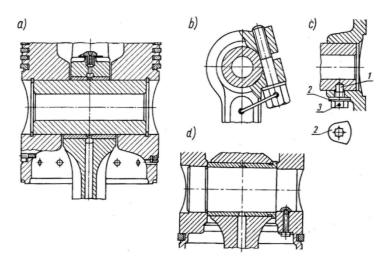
Examples rear piston pins: a) the carrier bolt floating, b) the carrier bolt mounted in the head of the rod, c) the carrier bolt mounted in the hub Piston, d) stepped carrier bolt.
